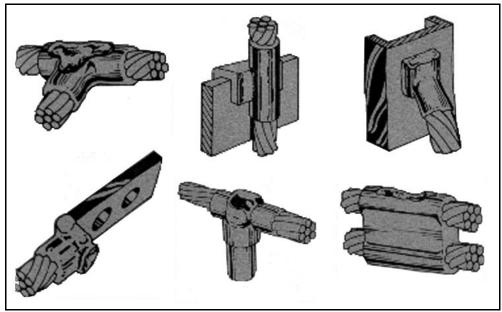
Typical "Exothermic" Welds Made Using the Cadweld Method.
